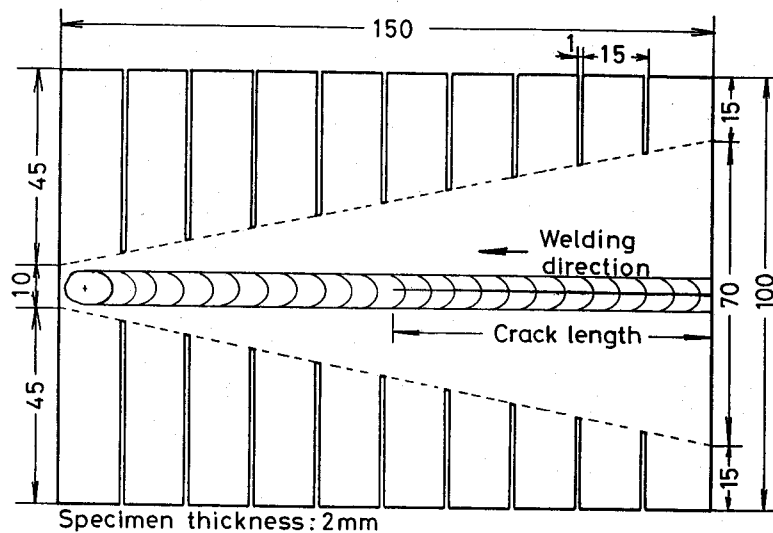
Shape and dimension of Houldcroft type cracking test specimen.
